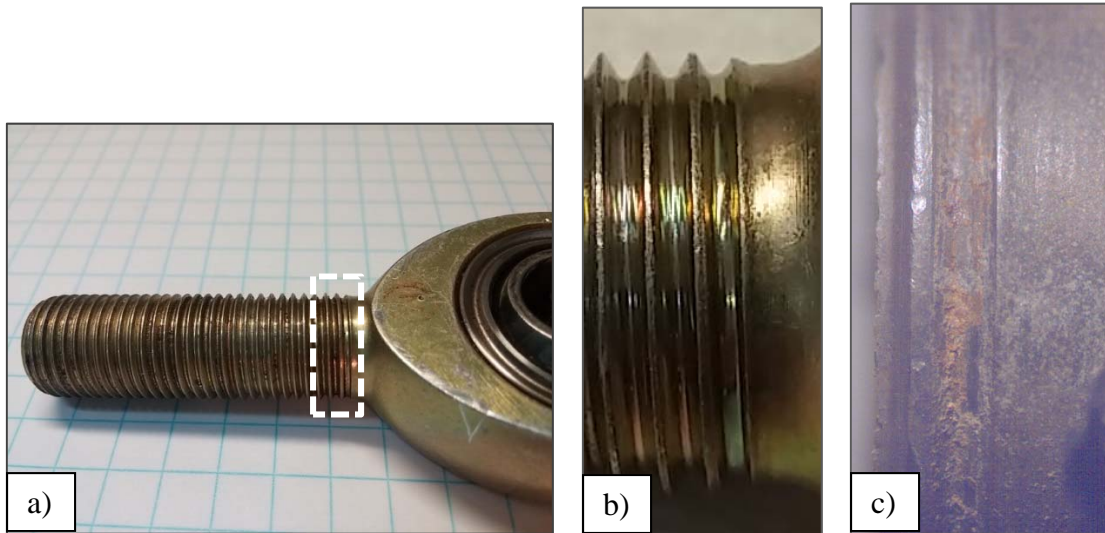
a) Rod end assembly (removed for clarity), area within the box is representative of photo b) and c) area); b) Airworthy rod end (as installed); c) unairworthy rod end with thread root corrosion
